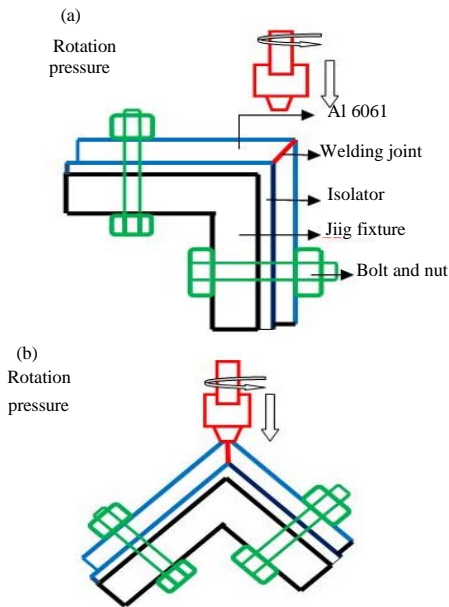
Drawing jig fixture and probe position WFS: a) Welding Position 1 and b) Welding Position 2
